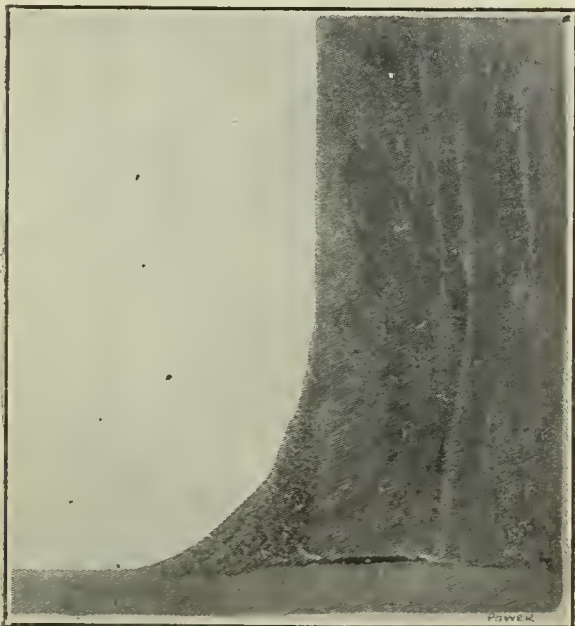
ARC-WELDED FLANGE SHOWING DEMARCATIIONS
